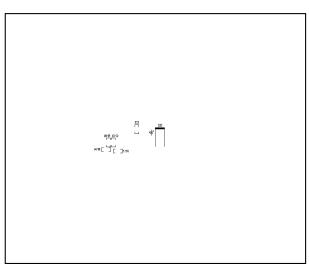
LM74912Q1EVM Board Bottom Overlay
